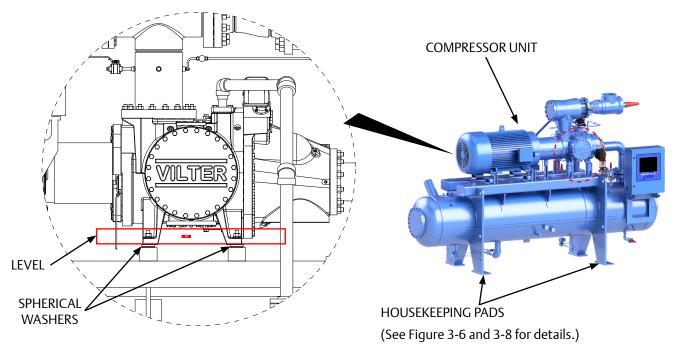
Level Compressor Unit Using Top Surface of Spherical Washers
